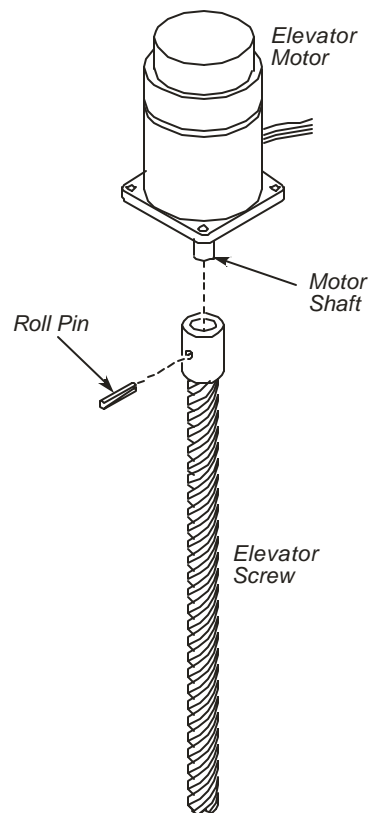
31 Removing and Mounting the Elevator Leadscrew and Roll Pin from the elevator Motor shaft.
